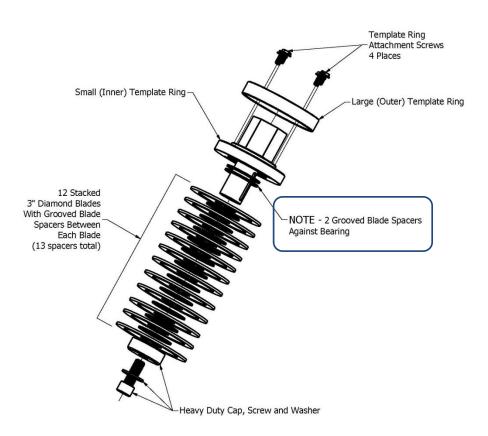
Rapid Z[™]-CUT with Template Bearing (Exploded)
